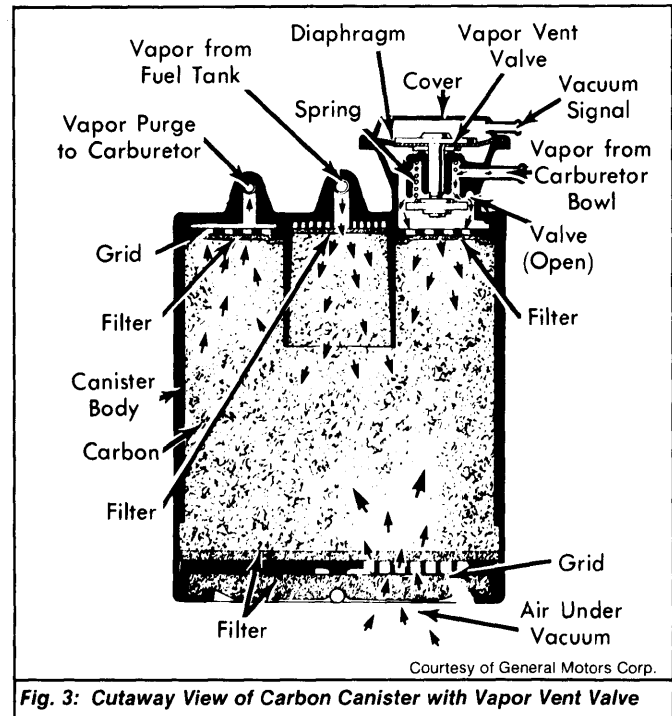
Cutaway View of Carbon Canister with Vapor Vent Valve
